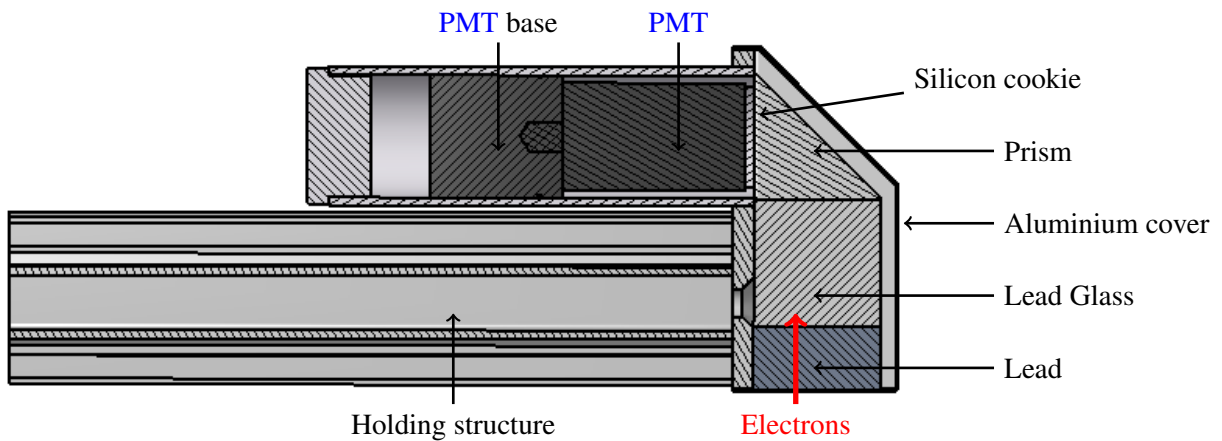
Schematic cut through drawing of one Møller detector assembly.
